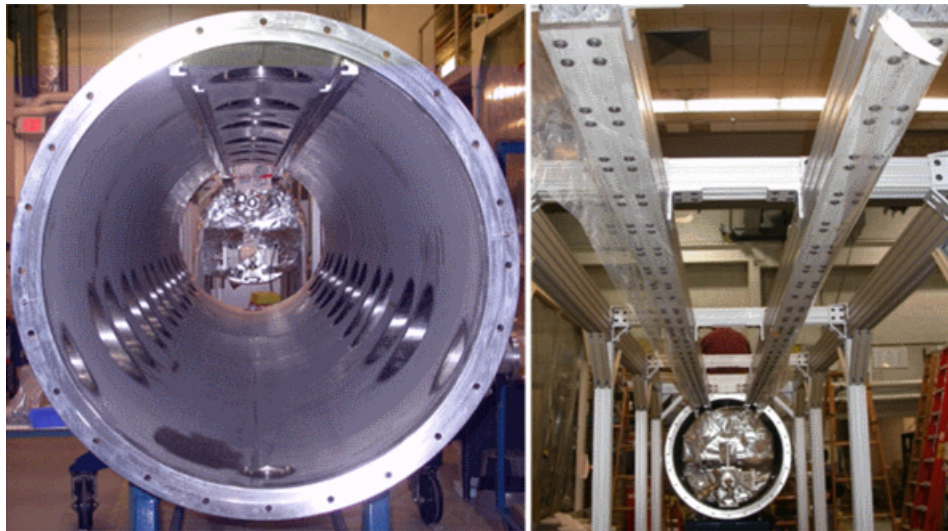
The Cornell ERL injector prototype cold mass before and after being inserted into the vacuum vessel by a rail system.
